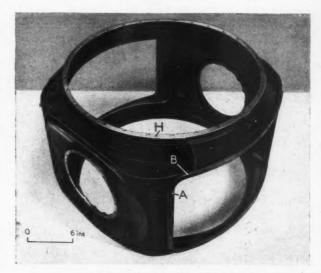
A Nimonic welded assembly which forms the thrust reverser box for the Rolls-Royce Avon gas turbine engine is here seen in the partly machined condition
